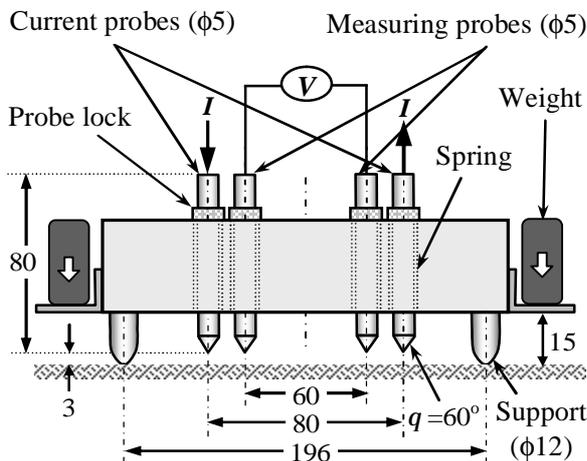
Details of the DCPD measuring sensor (dimensions in mm)
